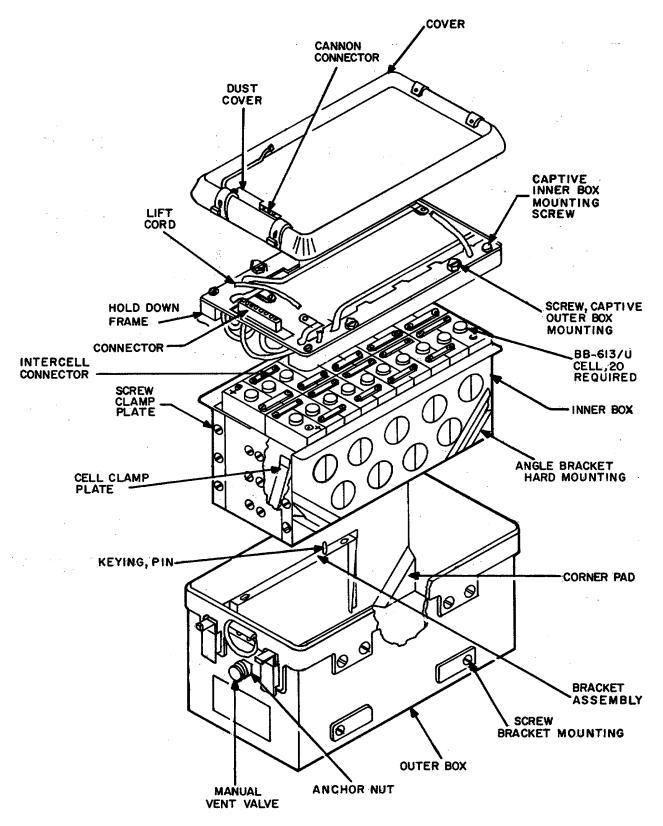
Battery, Storage BB-501/U, Exploded View
